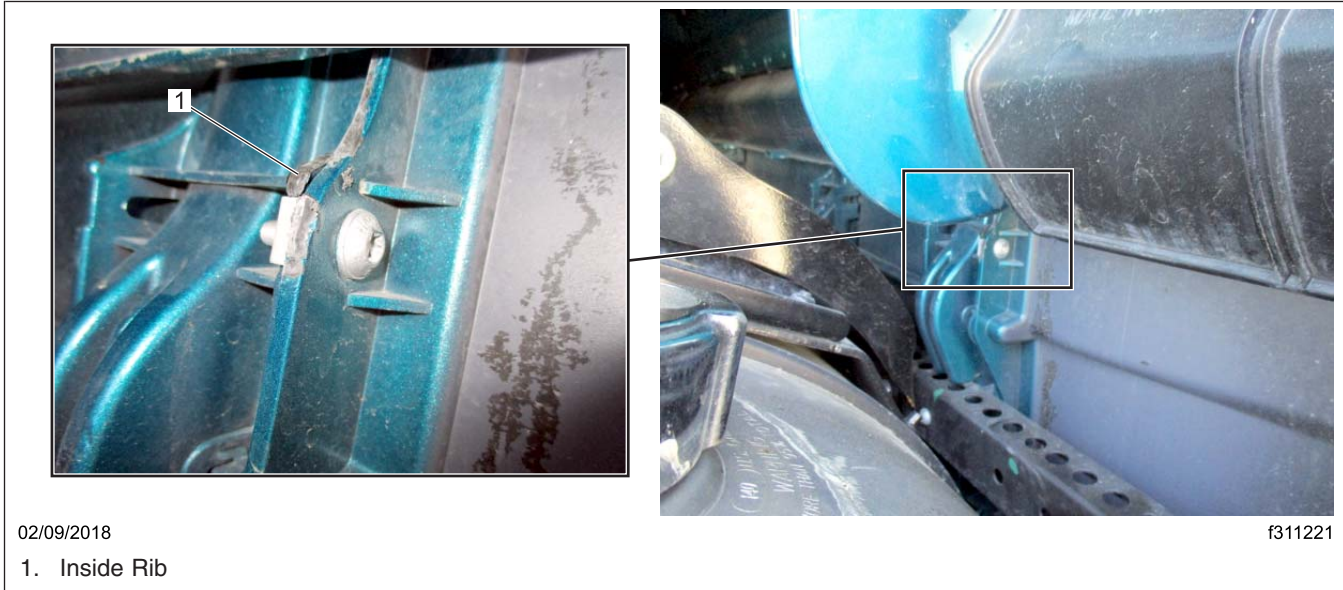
, Checking if the Inside Rib Contacts the Chassis-Side Fairing (fuel tank mounting shown)
